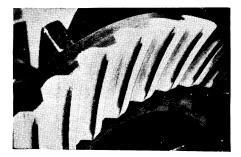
High narrow contact. To correct, move pinion toward bevel gear
